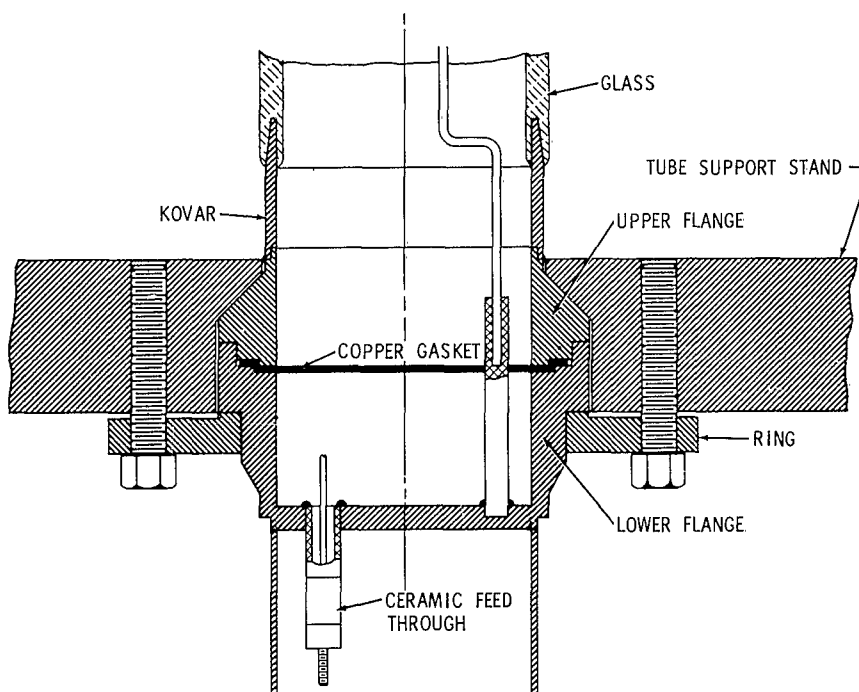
Sketch of the copper gasket seal arrangement between the tube base and vacuum system.
